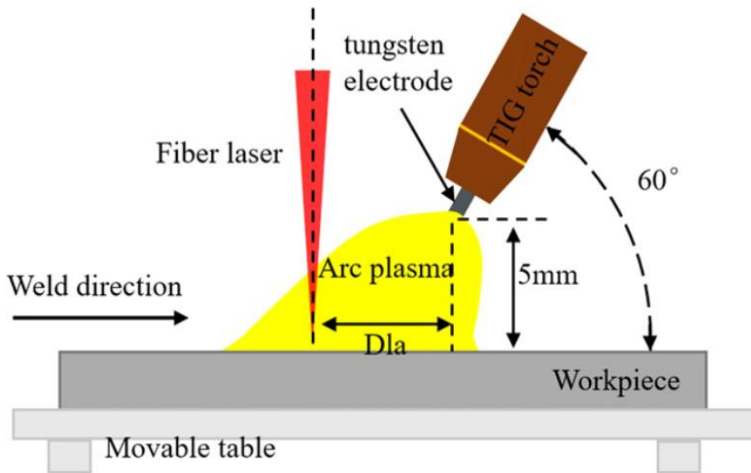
Schematic Diagram of Laser-Hybrid TIG Welding (Mu, Z., et al., 2019).
